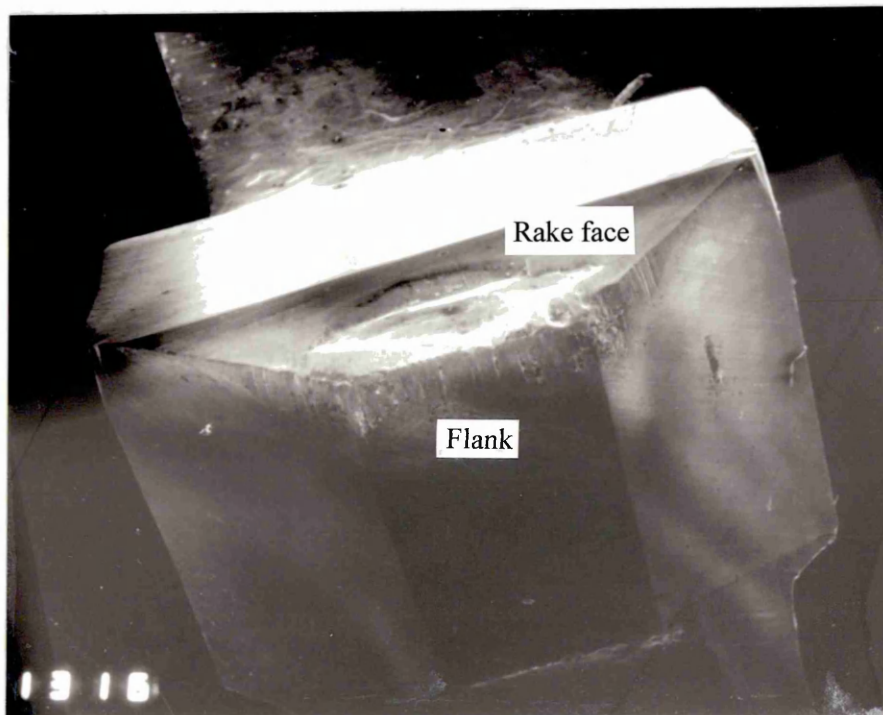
The flank wear of the tooth when sawing stainless steel
